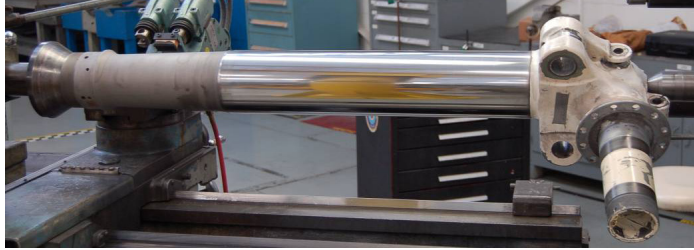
HVOF-sprayed landing gear component [<http://www.asetsdefense.org>]
